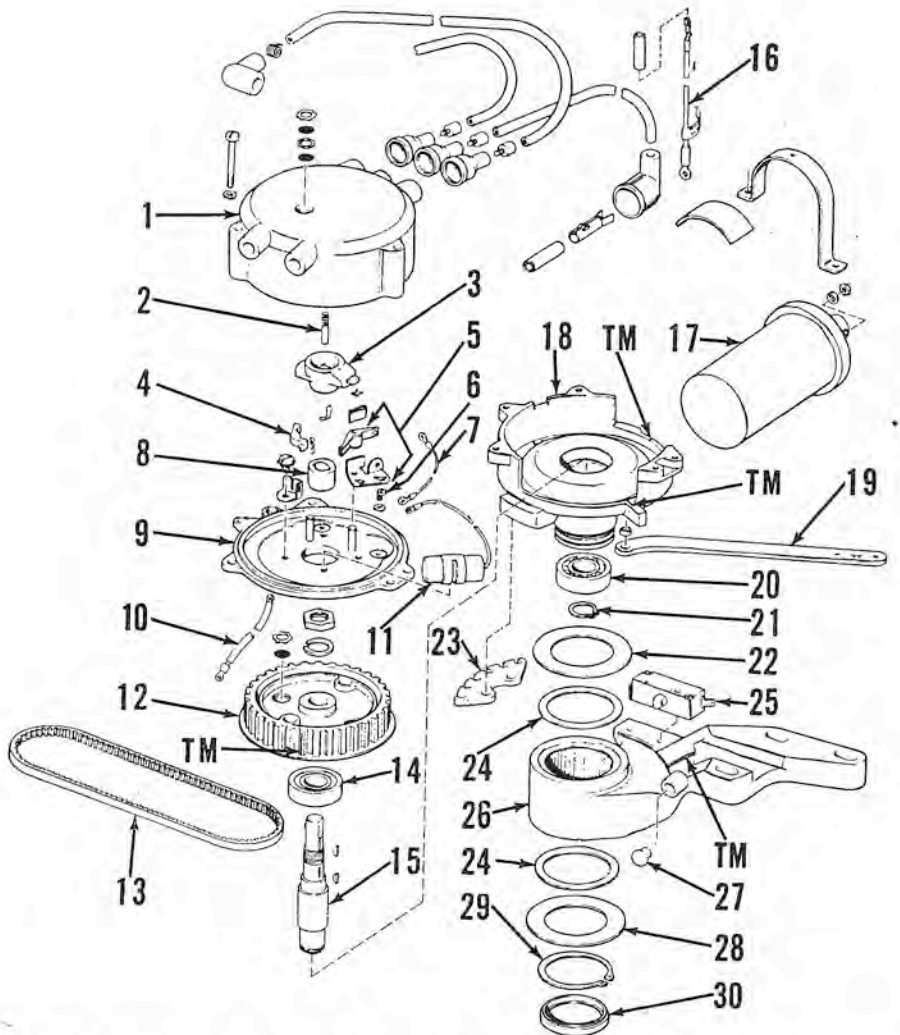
Exploded view of battery ignition system used on some late models. Installation and timing is similar to that of magneto equipped motors.
